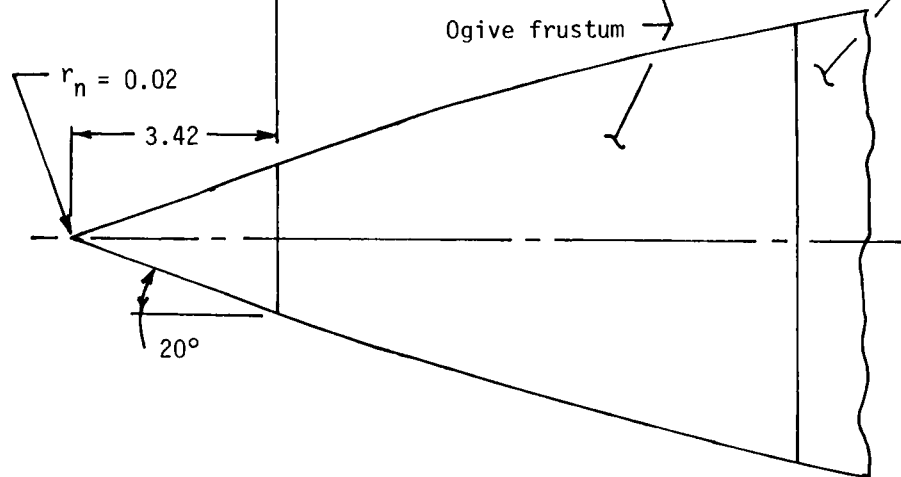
Nose shapes for attachment to 12.5° cone frustum. Dimensions are given in inches unless otherwise specified.
